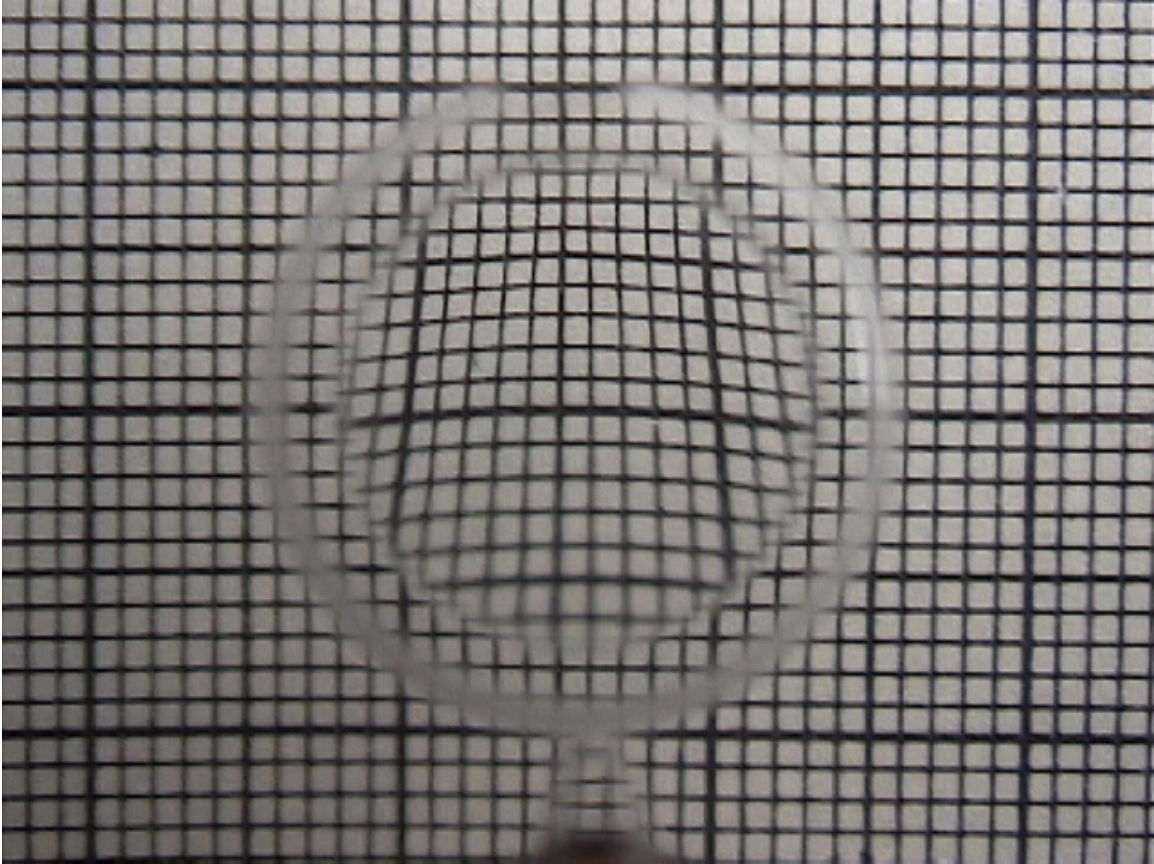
Injection molded cubic phase plate for computational imaging. Mold fabricated with fast tool servo diamond turning.
